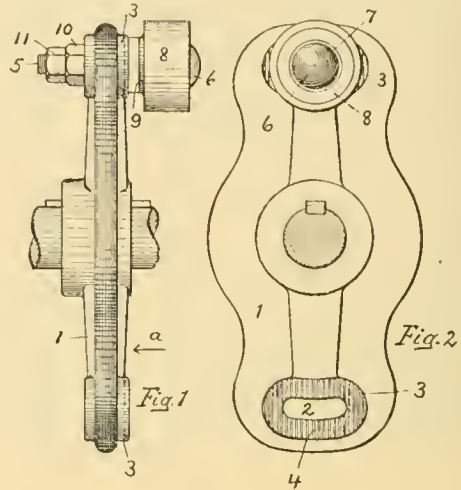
is an edge view of a picker arm with one roll thereon, shown mounted on the cam shaft. Fig. 2 is a side view of the parts shown in Fig. 1 looking in the direction of arrow a, same figure.
